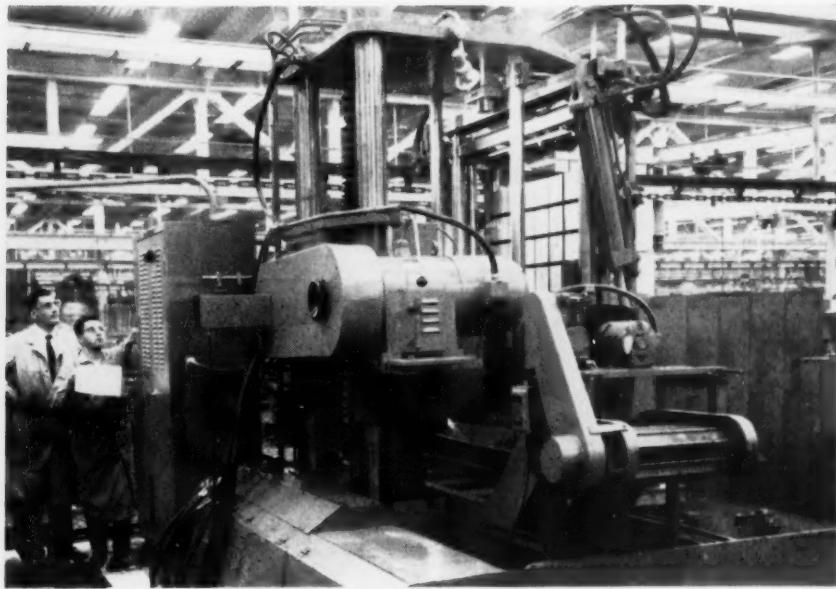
One of the smaller new machine tools is this tape-controlled, high-speed, single-spindle horizontal drilling machine capable of drilling 8 to 10 inches per minute through 10-inch plate.
